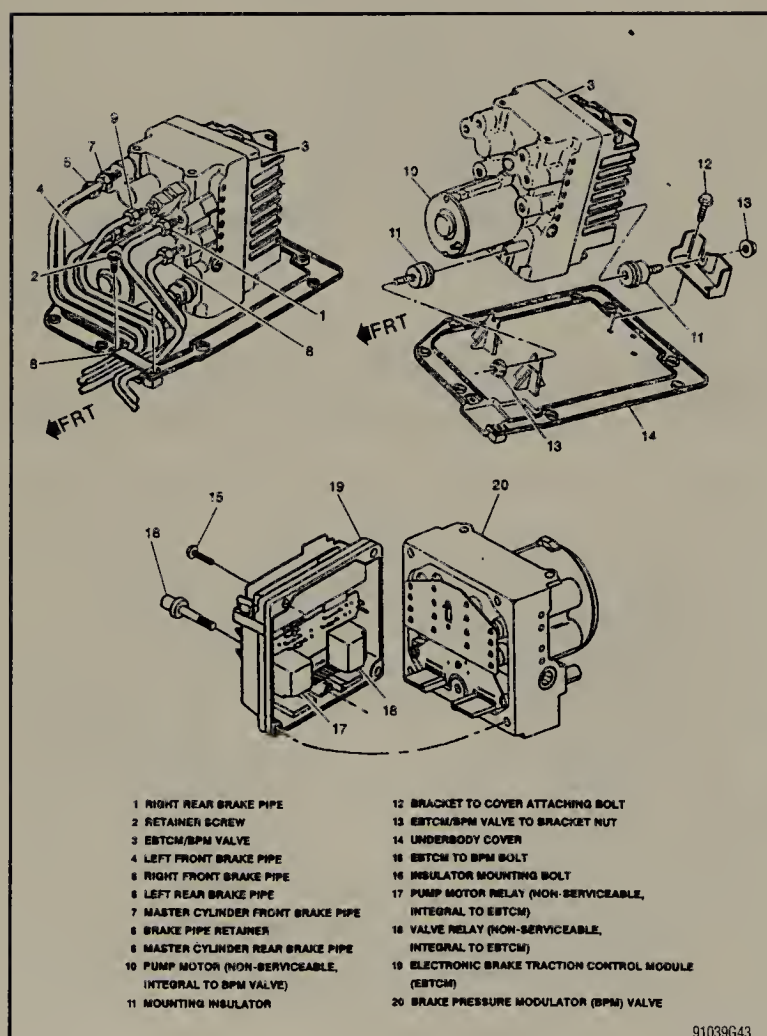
Exploded view of the BPM/EBTCM valve assembly—1995 VIN P engine and 1996 vehicles
